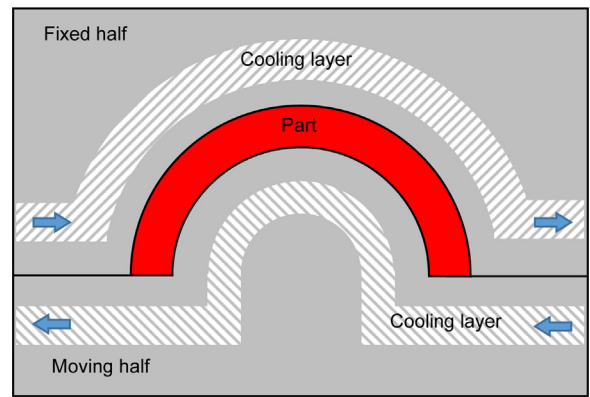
Schematic injection moulding tooling with conformal cooling layers.
